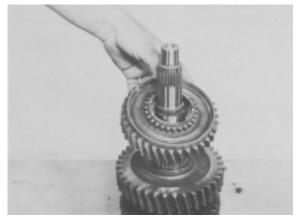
Position 2nd speed gear on bearing with clutching teeth up.
